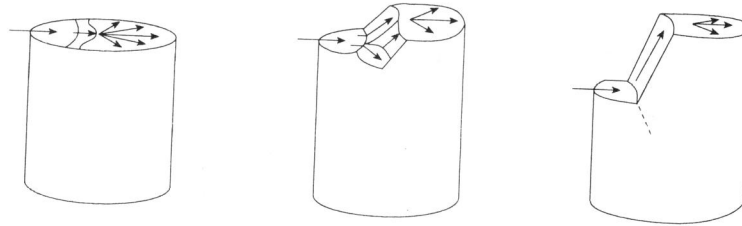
Fracture surfaces of steels with increasing degree of cold drawing.
